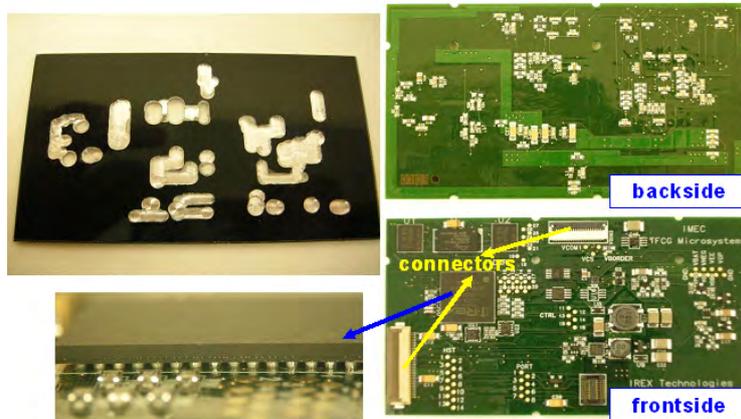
Double-sided assembly of a flexible PCB for the driving electronics: insets are created in the carrier fitting the components, namely the smaller passives, on the backside; the larger packages, including a very large IREX BGA, are assembled at the frontside
